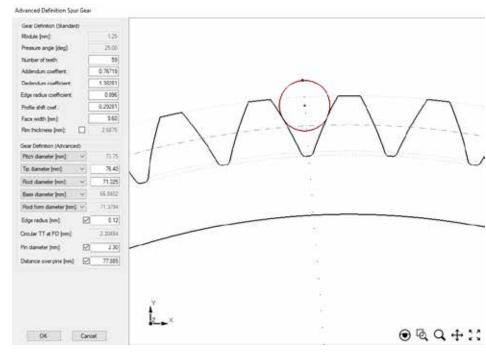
Gear parameters used to generate the 3D CAD gear model in IGD.
